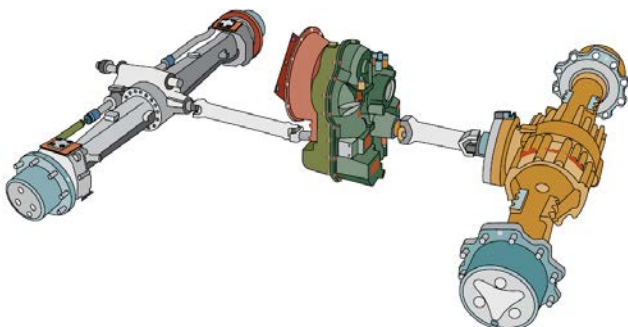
Typical example of a power transmission with a powershift gearbox [3]
